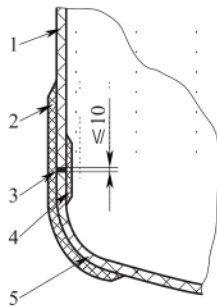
Butt joint between convex head connected and the cylinder
